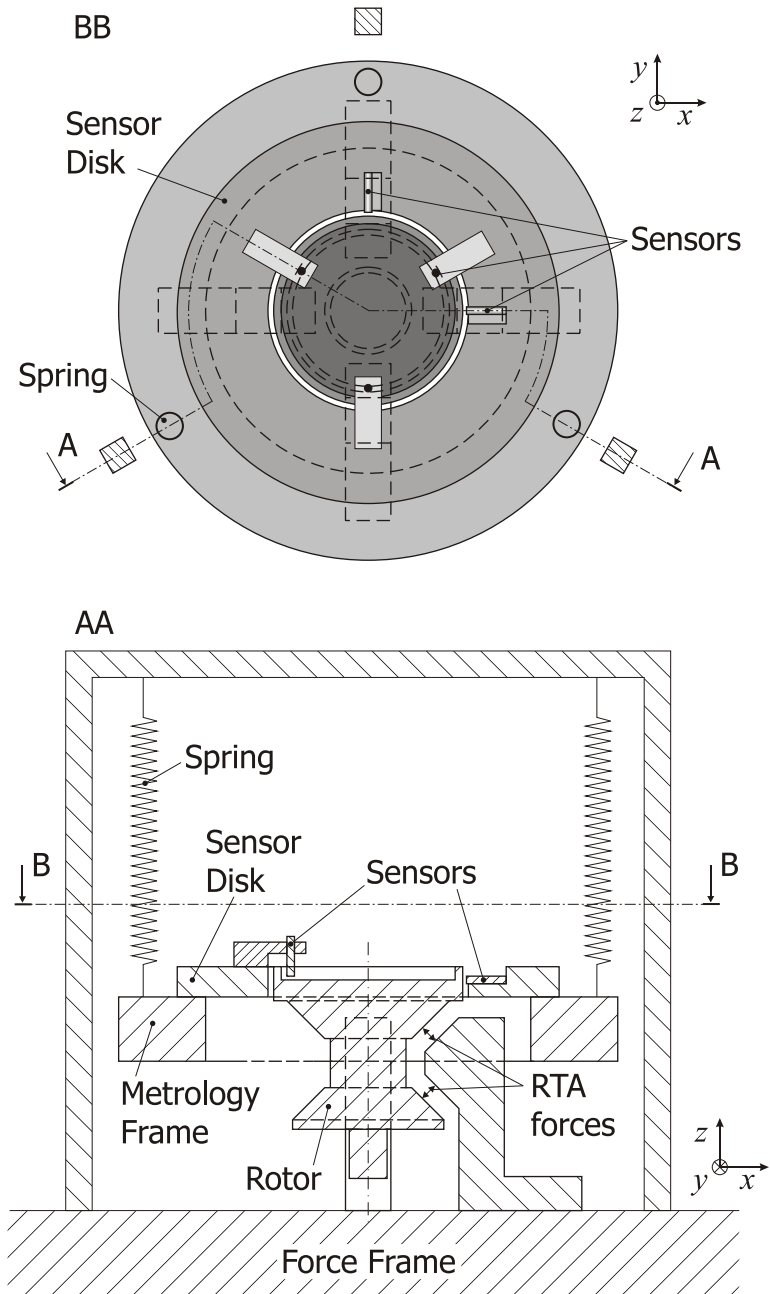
Schematic drawing of the complete mechanical design of the rotating demonstrator.
